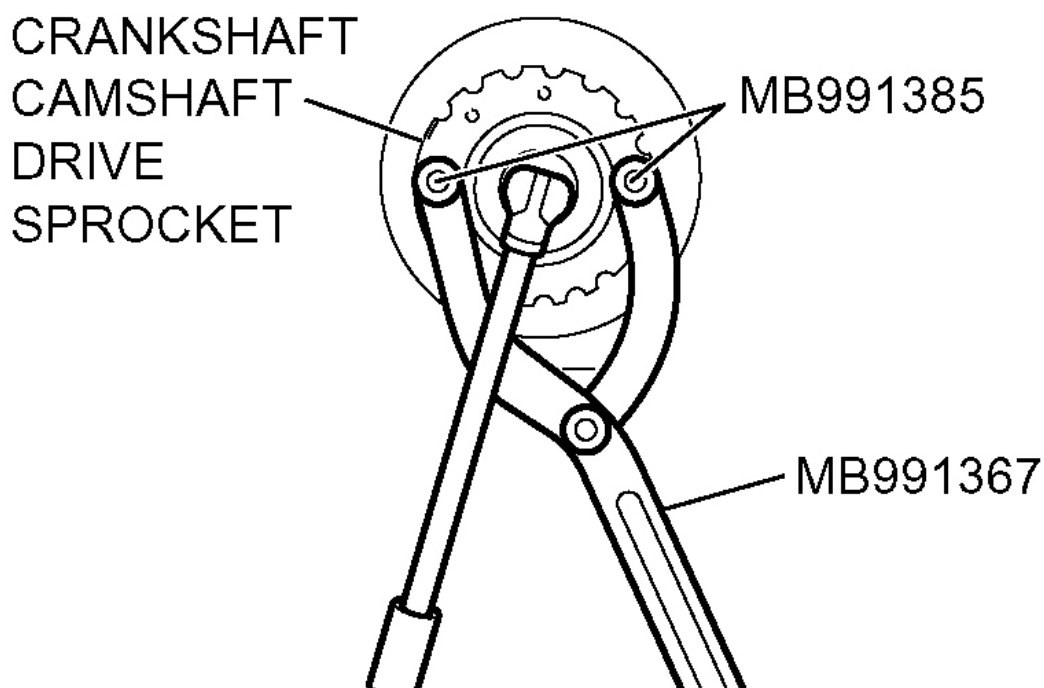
Removing Crankshaft Camshaft Drive Sprocket
